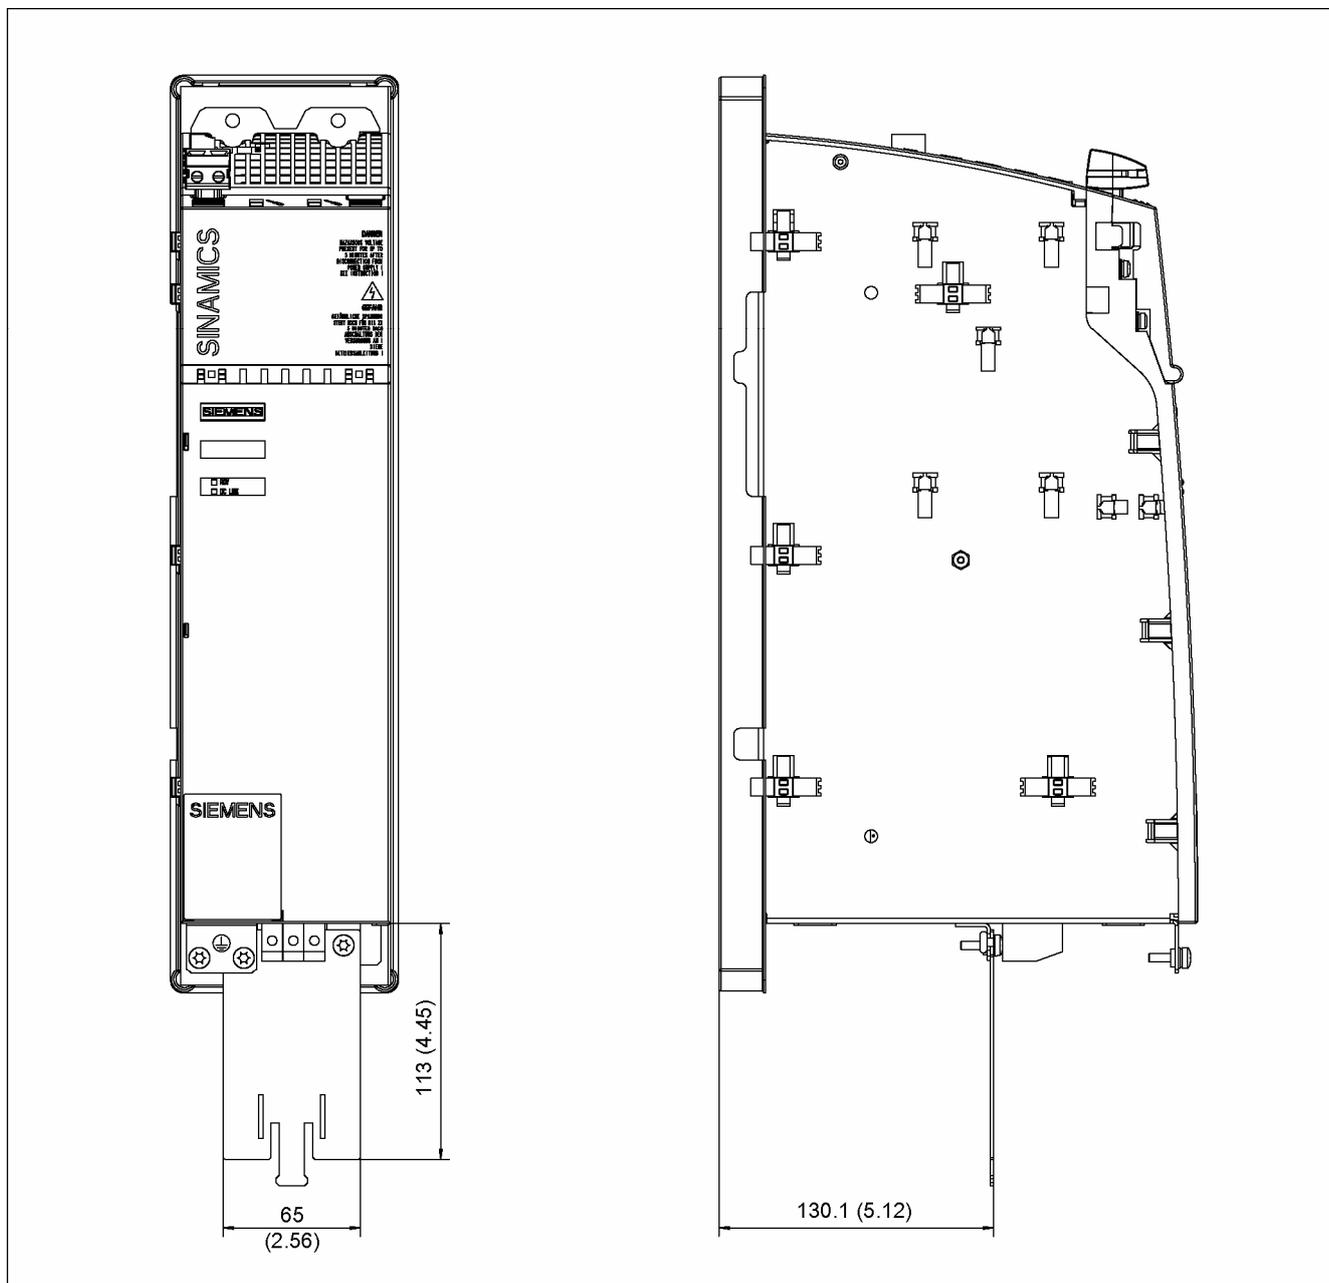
Dimension drawing, shield connecting plate on a 100 mm component with cold plate
